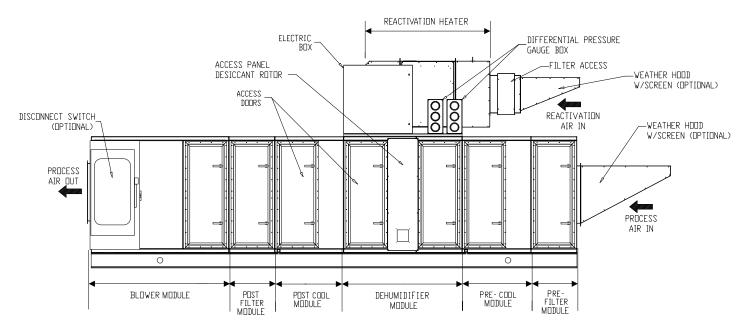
shows a general layout of a typical DHP system. Your unit may vary, so refer to the Installation drawing provided in your Technical Data Package for the modules that make up your unit. The Installation drawing also shows the location of major parts/features and the dimensions and weight of the unit.
